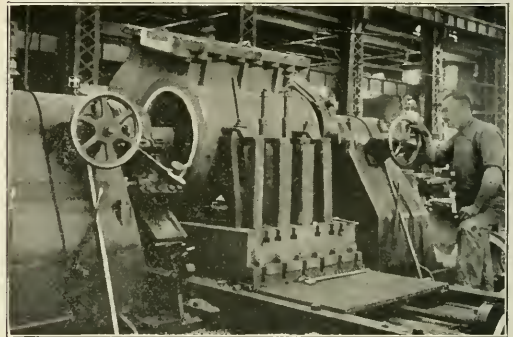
Powerful Sellers Cylinder Boring and Facing Machine
